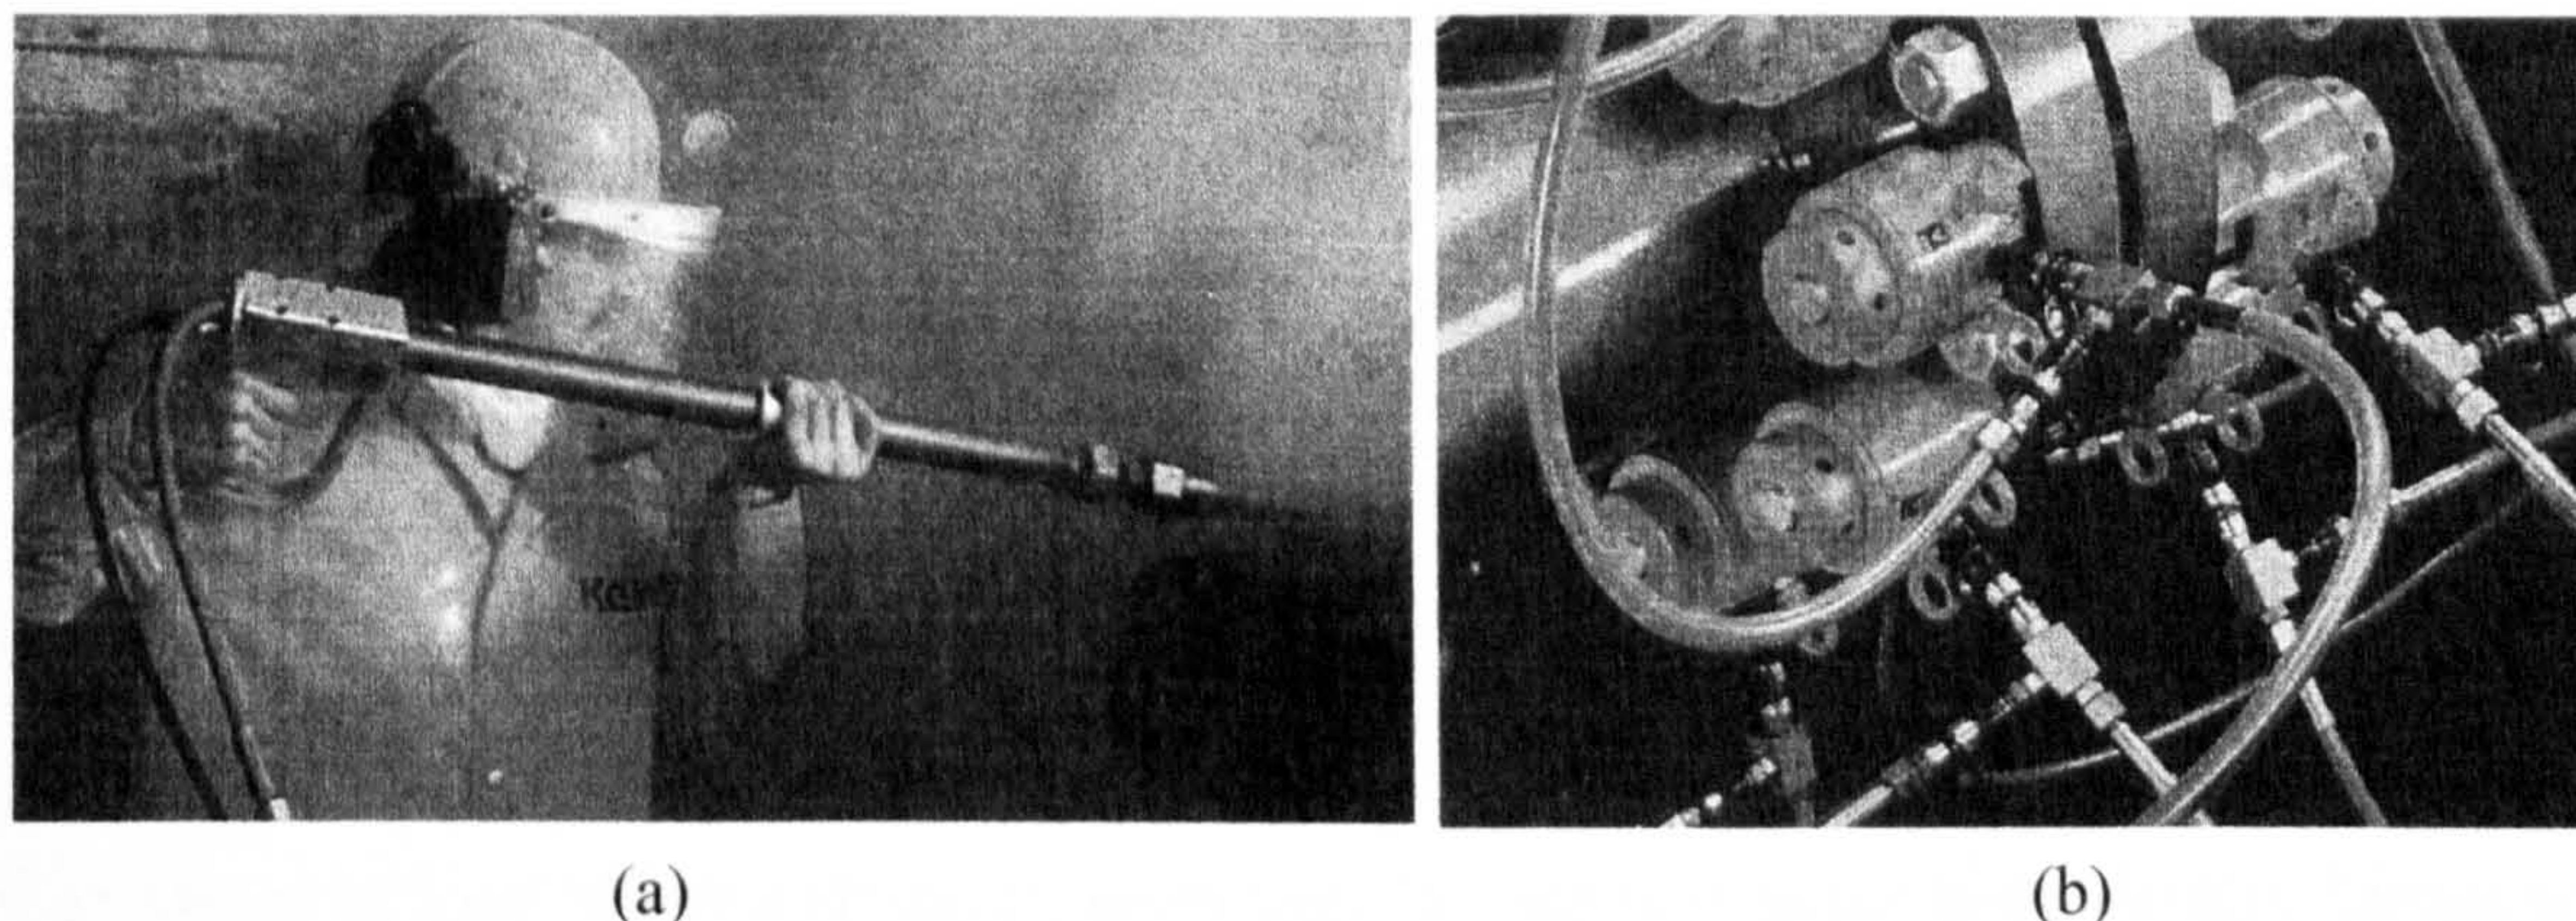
Examples of high pressure hose application: (a) an operator carrying out water jet blasting and (b) a flange held where a specific tension is kept on the bolts by means of a bolt tensioning device (from Polyflex [10]).
